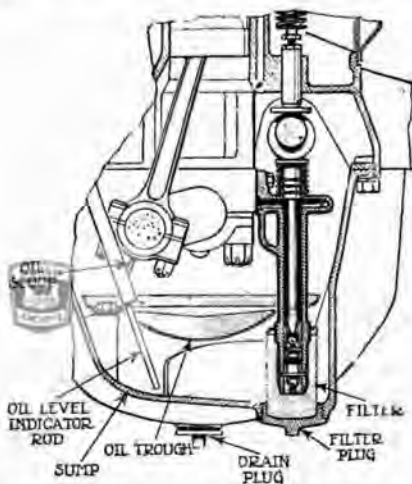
Transverse section of the crank case, showing the position of the oil pump, filter and troughs.
